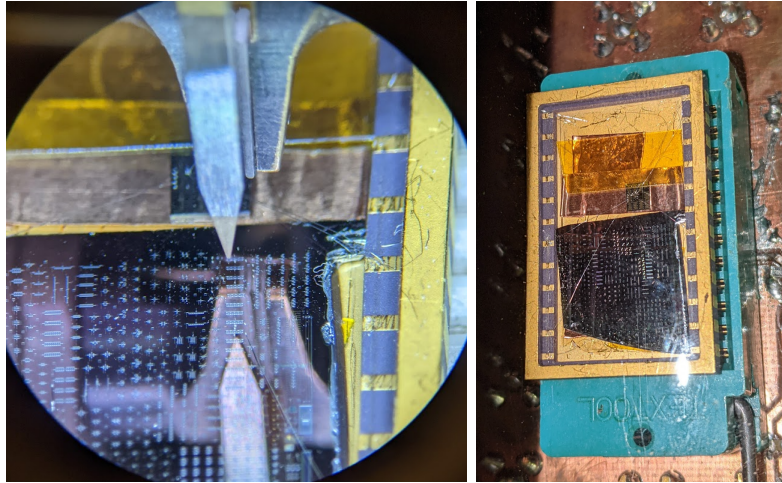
Wirebonding process and oscillator circuit in the vacuum bulb.
